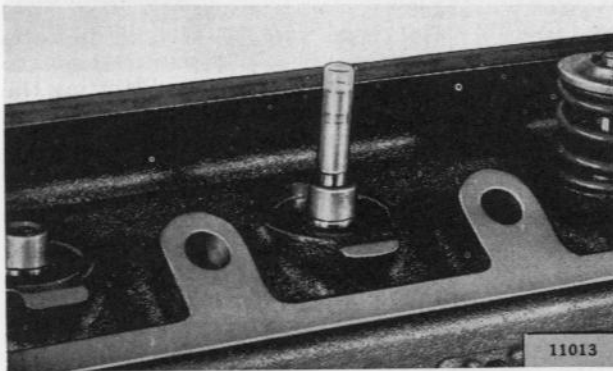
PLASTIC CAP OF INSTALLER TOOL W-273 POSITIONED ON VALVE STEM
